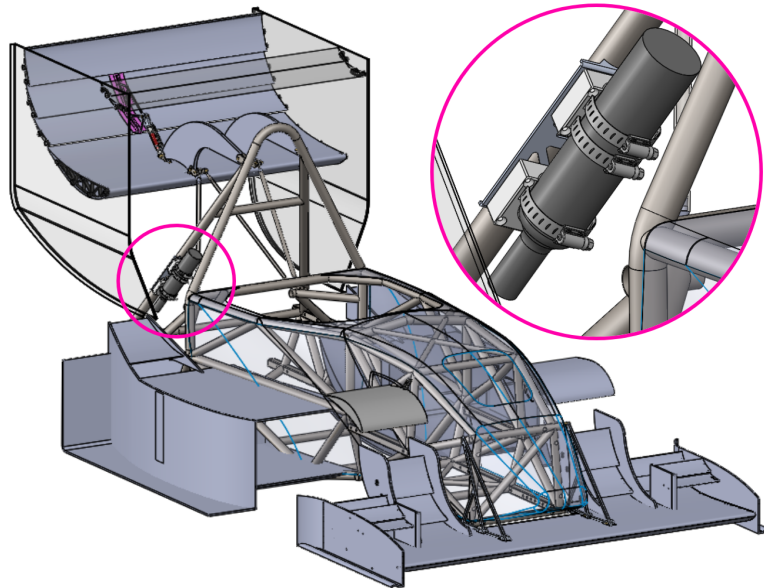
Air bottle mount (highlighted in pink) location on the electric car
